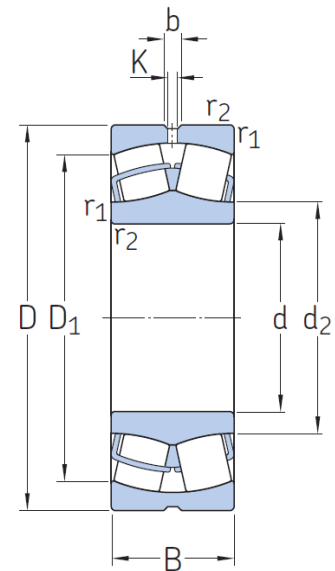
SKF 22240 CCK/W33 bearing scheme
